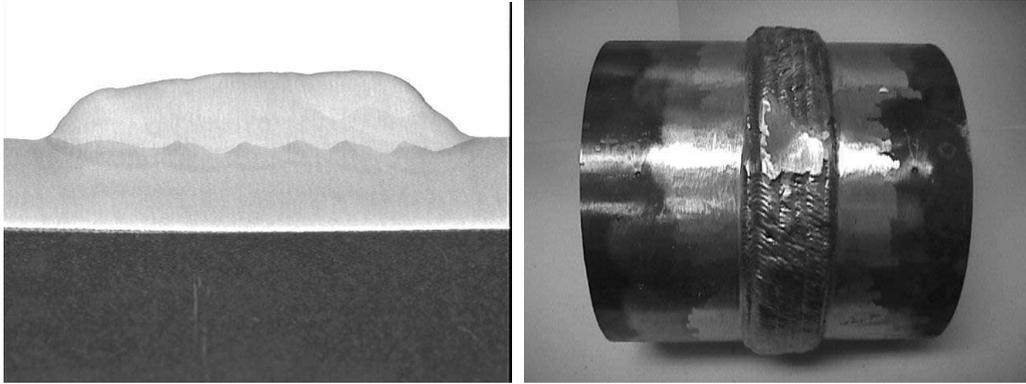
Overlay weld specimen with the GMAW-AU process (Courtesy of PCI-Energy).
